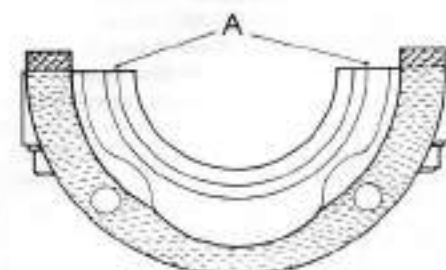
Cement gasket to halves of rear main bearing seal, or seal retainer, as shown, then using sharp blade, trim gasket flush with surface (A).
